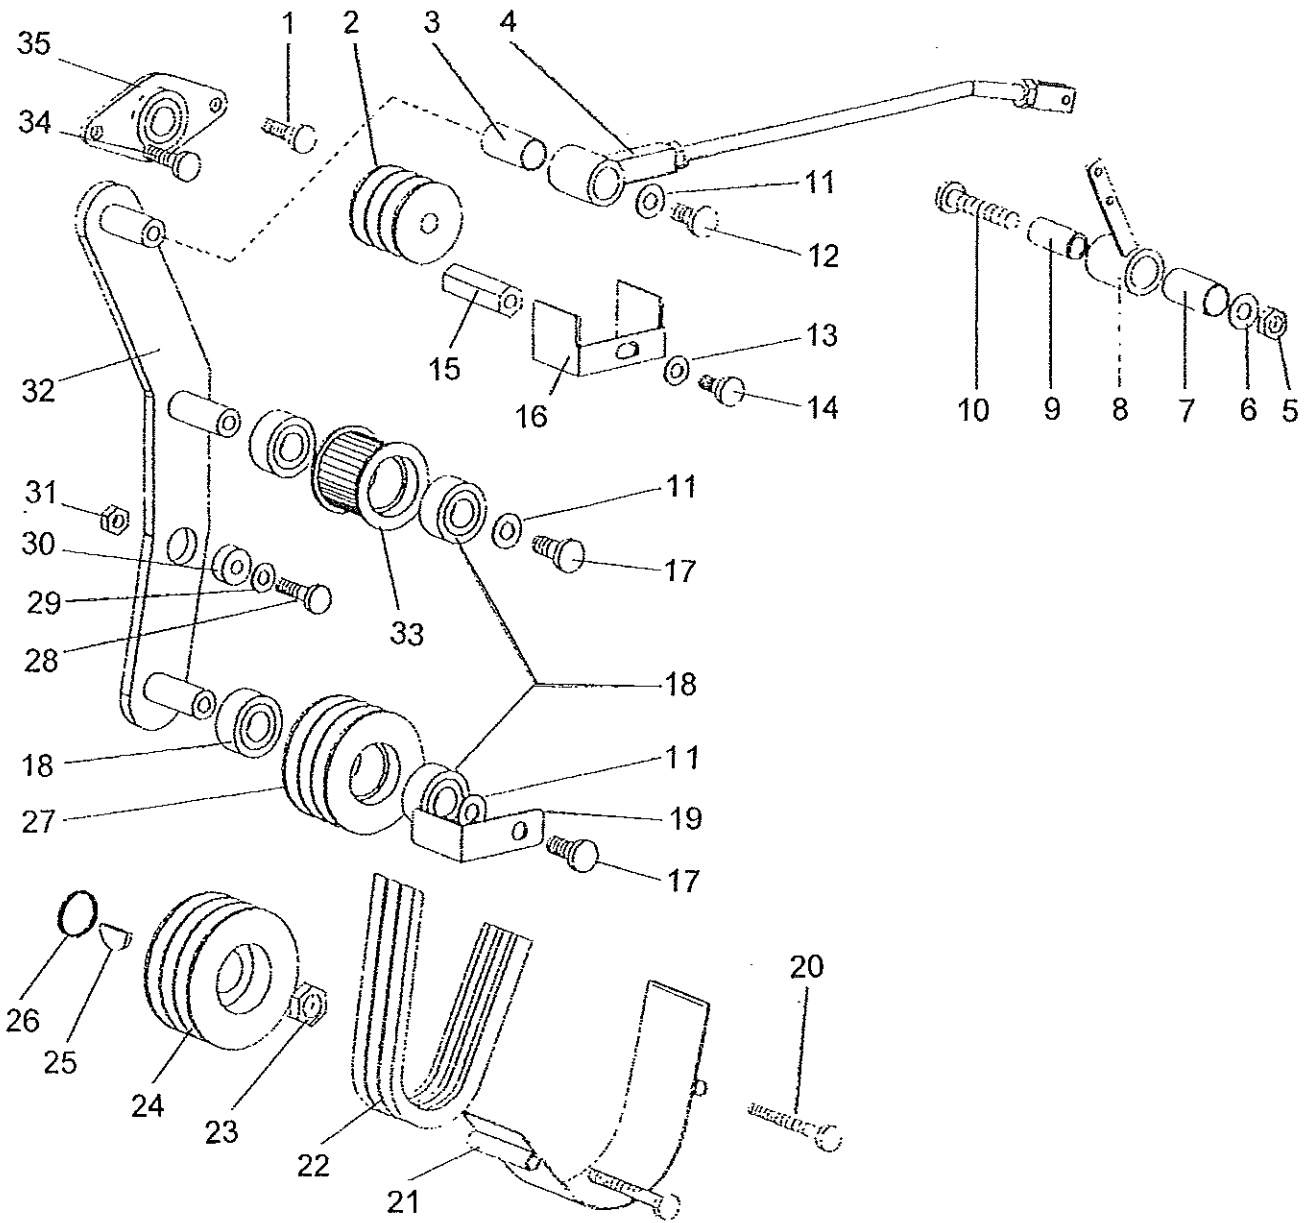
CYLINDER DRIVE ASSEMBLY
